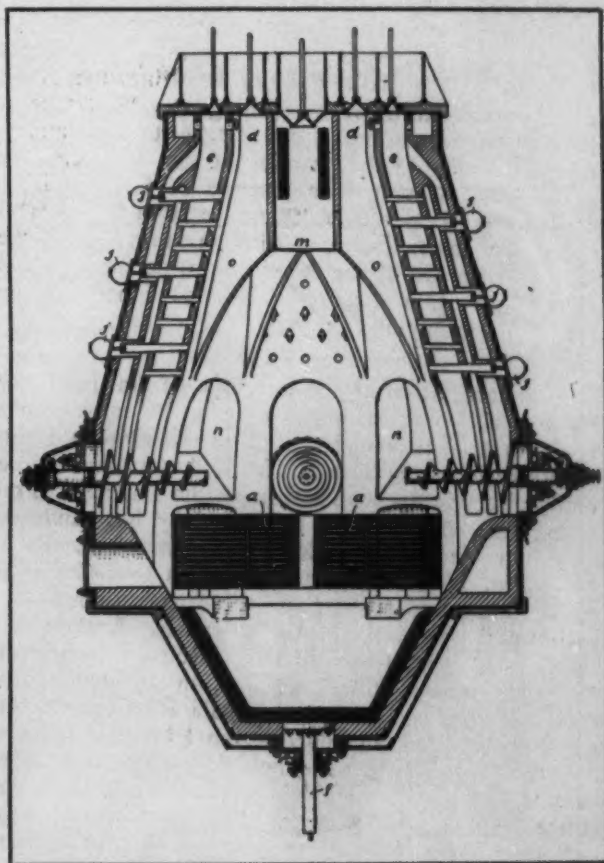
Sectional View at Right Angles to that of Fig. 2, with No Charge in the Furnace.
